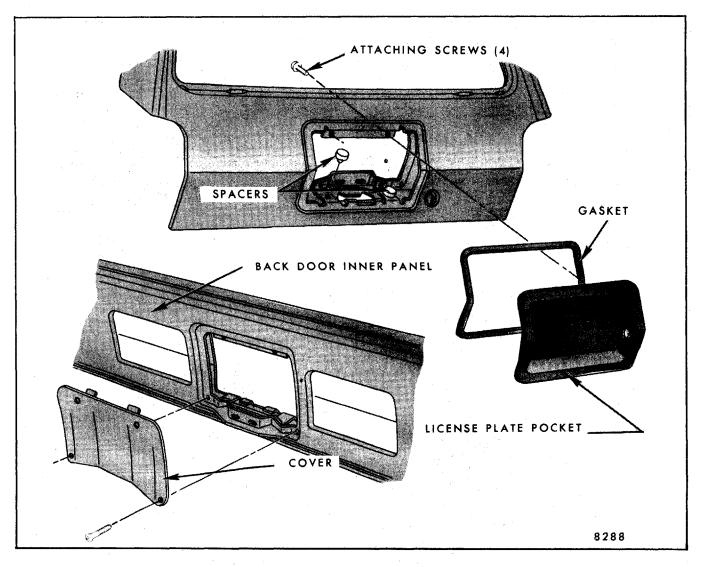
License Plate Pocket and Inner Cover - H-15 Styles
